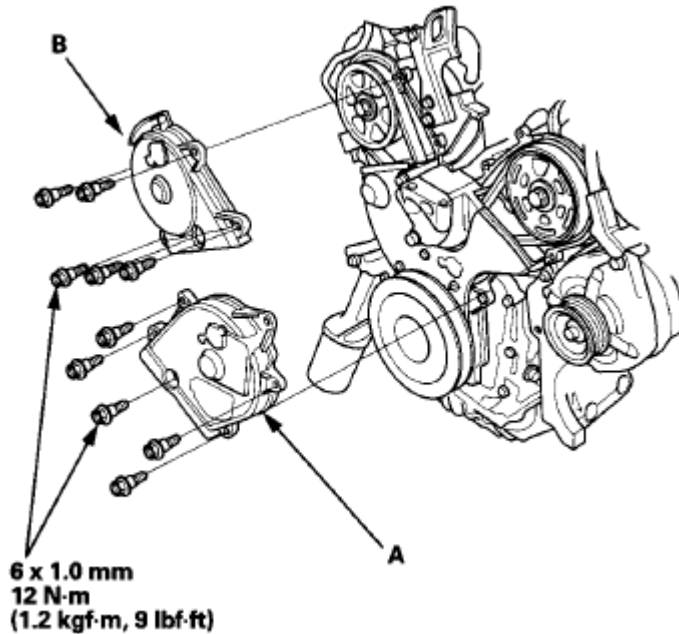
Installing Front Upper Cover And Rear Upper Cover With Torque Specifications
